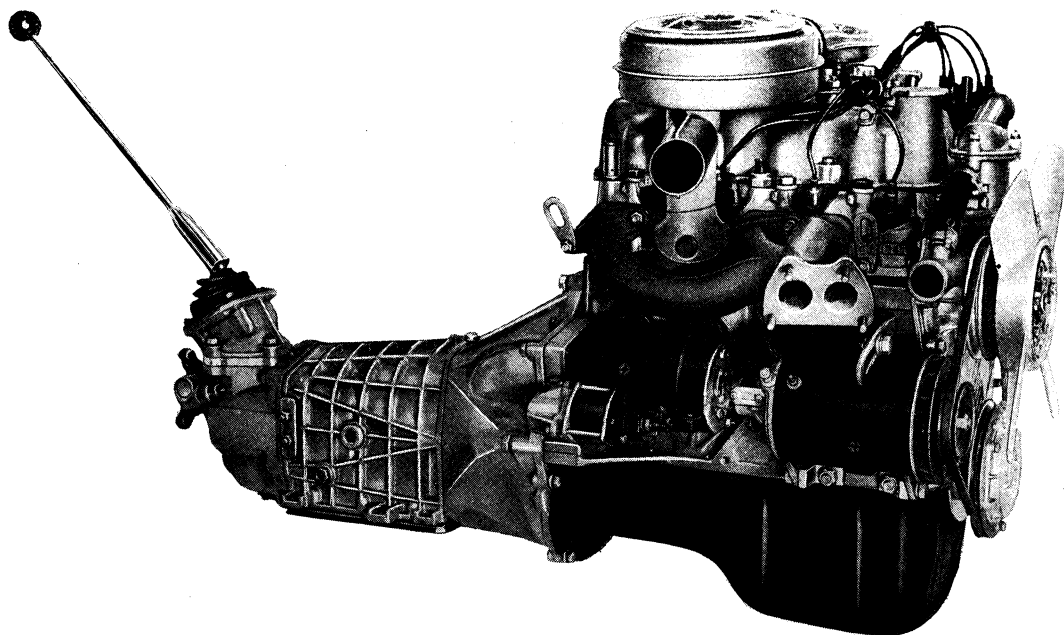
Right-hand side view of 1500 Cabriolet power plant.
